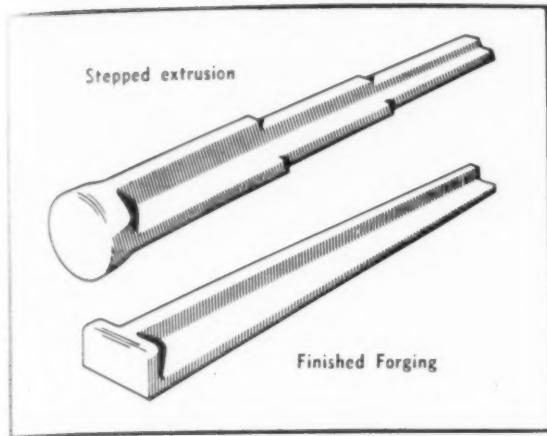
Tapered forging (bottom) saves material by using stepped extrusion with billet butt as forging stock (top).
